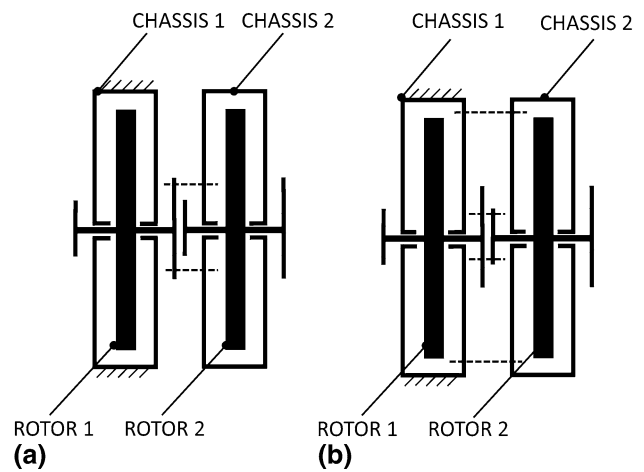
Angle assembly (a) and Torque assembly (b) of two basic modules
